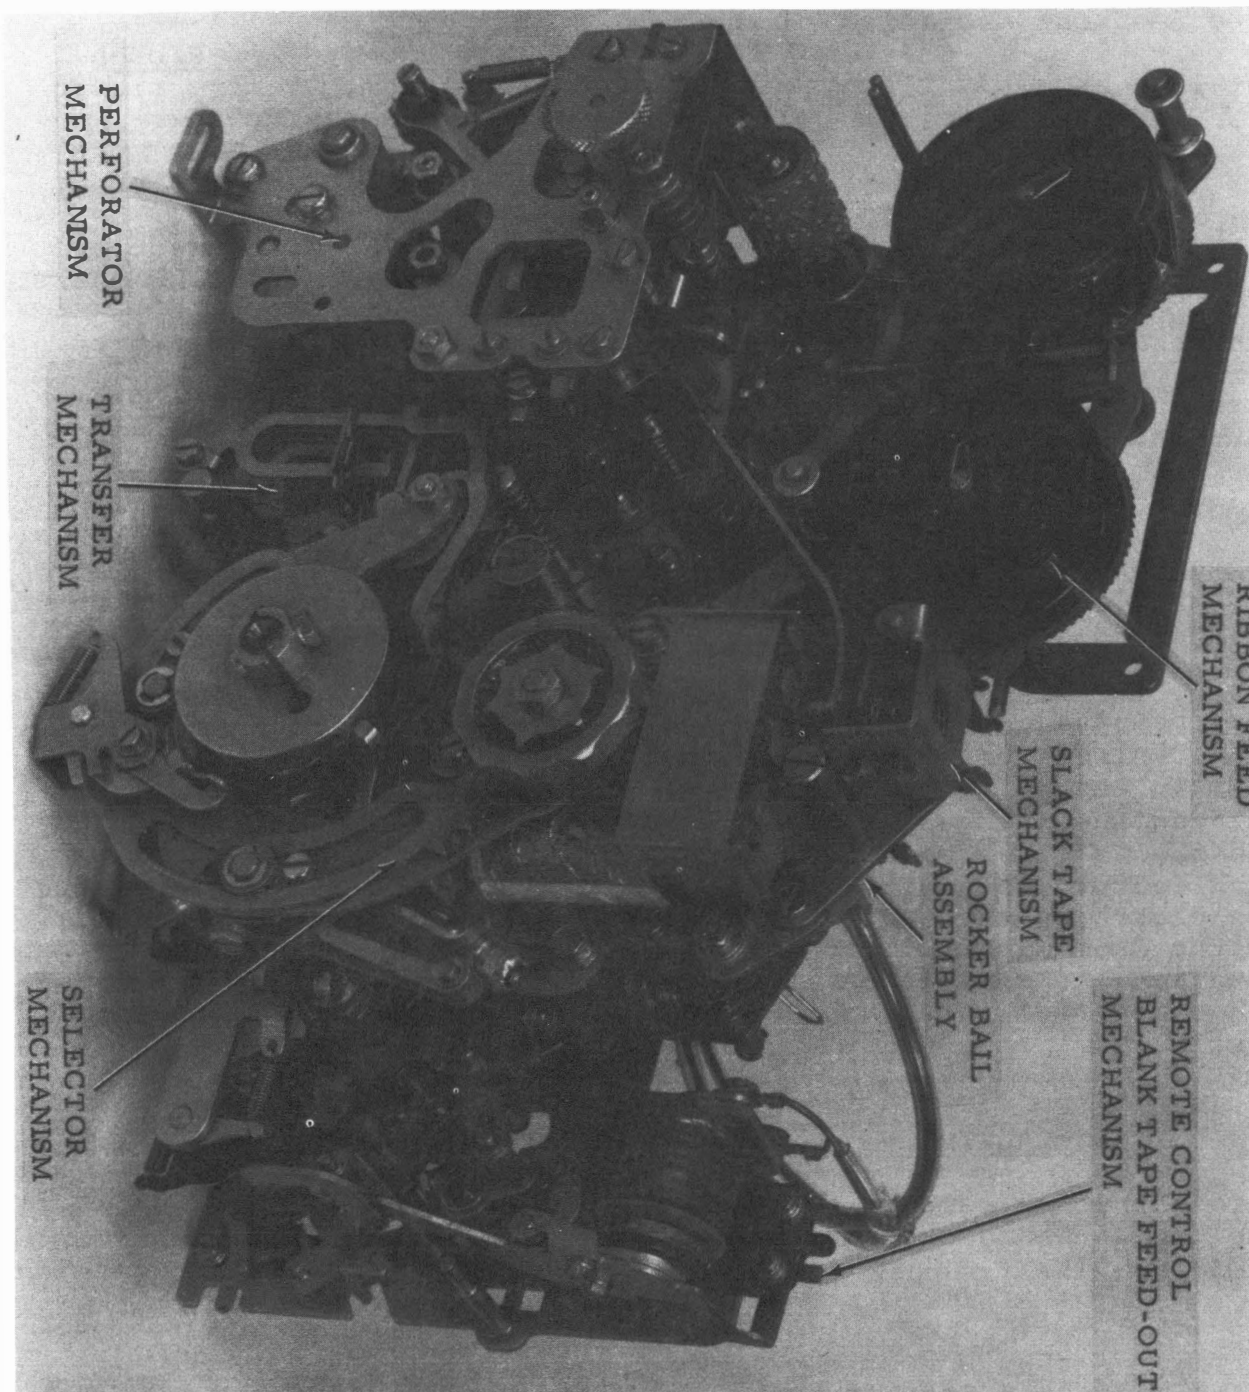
Typing Reperforator Unit with Remote Control Blank Tape Feed-Out Mechanism (Fully Perforated Tape)
